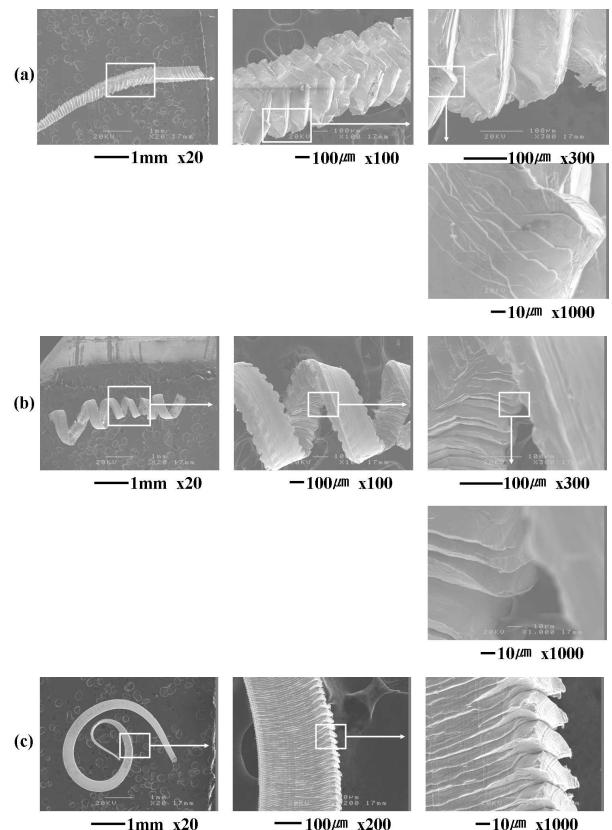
SEM micrographs of BMG chips machined using a PCD tool at each cutting speed; (a) 500 RPM, (b) 1,000 RPM, (c) 4,000 RPM
